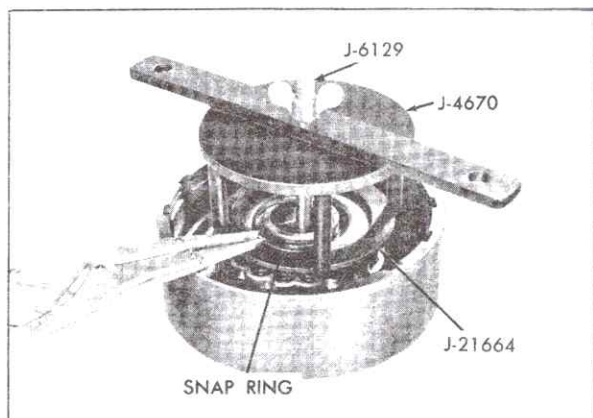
Removing and Installing Direct Clutch Housing Snap Ring
